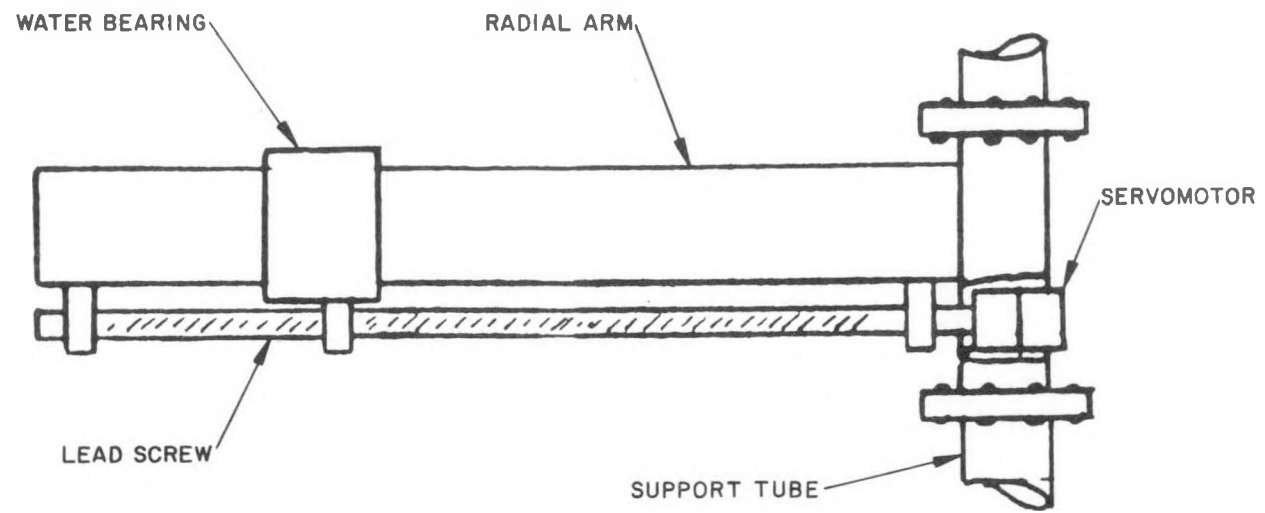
Schematic of RRS Radial Arm Bearing Assembly
